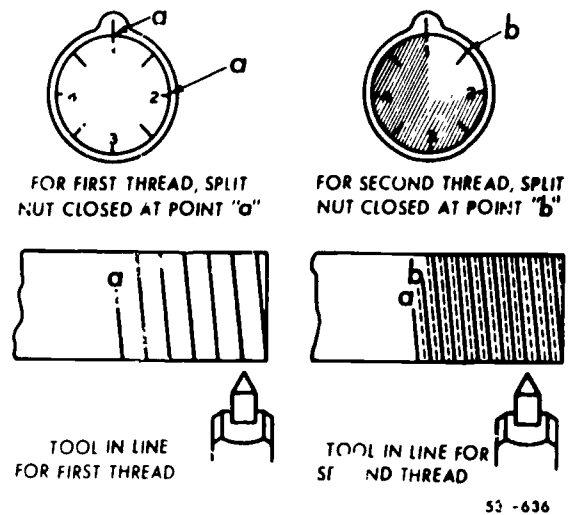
Cutting multiple threads using the thread-chasing dial
